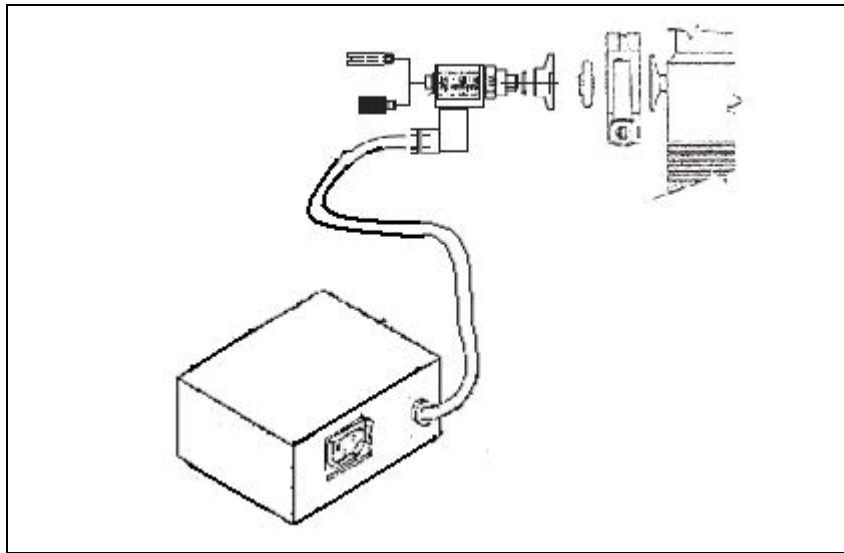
Installation on a Pump not Equipped with a Screw Cap
